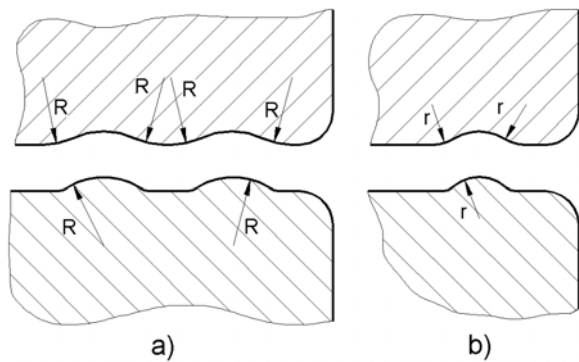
(a) Double draw-bead and (b) single draw-bead.
